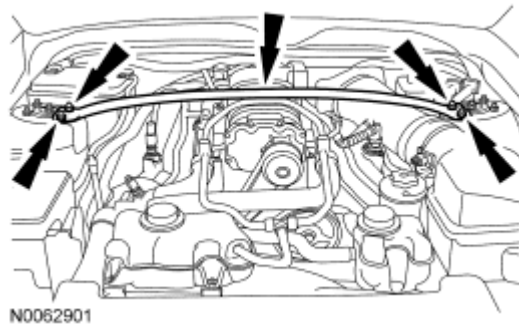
Locating Strut Tower Cross Brace & Nuts
